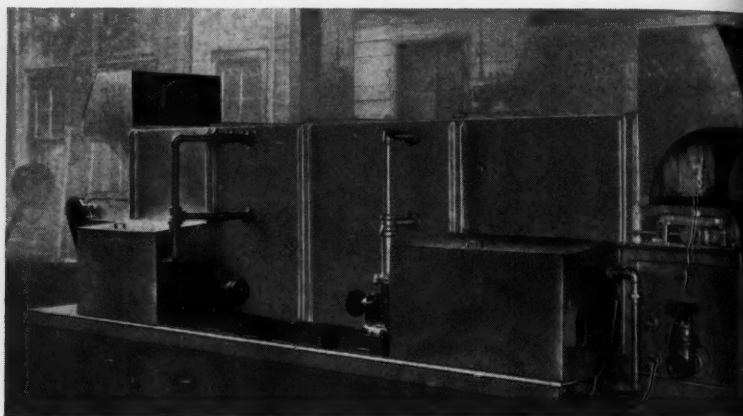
Two-Stage Washing Machine for Cleaning Miscellaneous Parts. This machine employs an alkali wash with hot water rinse. A wire mesh belt is used to carry small parts as well as larger parts. A machine of this type is of ample size and capacity to do a thorough washing job on a large variety of parts. Slotted pipe headers are used for nozzles.
